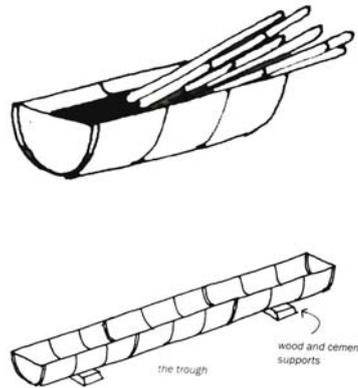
Extendable Welded Half Cut Oil Barrels
